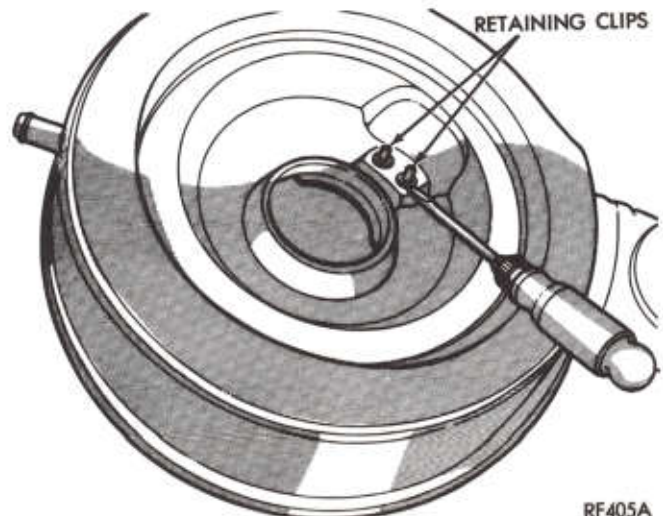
Removing Sensor Retaining Clip (Carbureted Engines)
